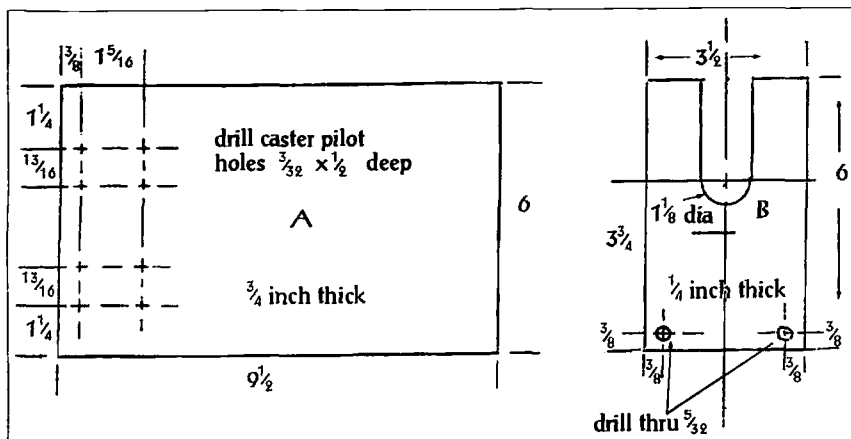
Details of base for capacitor assembly (dimensions in inches).
